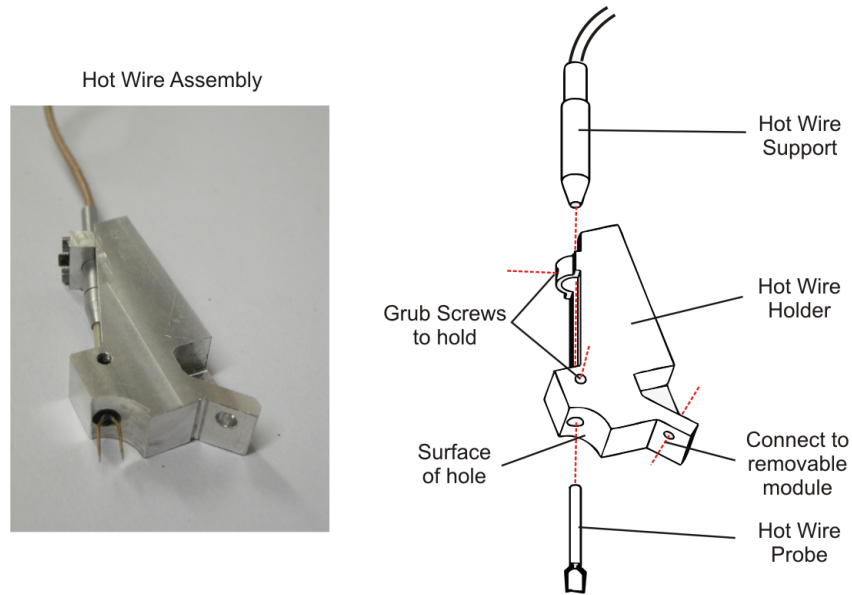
The Hot Wire Assembly to hold the hot wire probe within the cooling hole tube.
